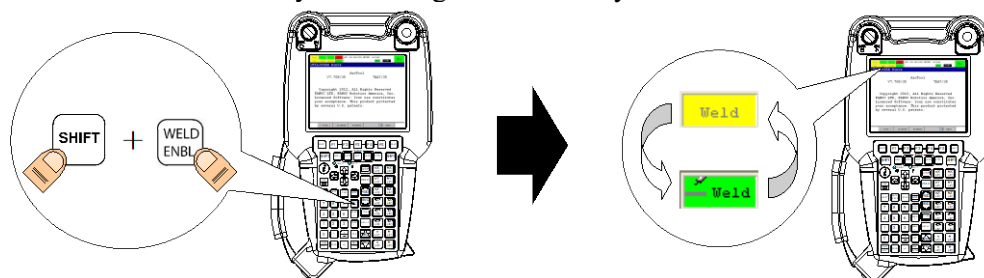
(b) Switching Operation of Weld Enabled/Disabled by WELD ENBL Key
